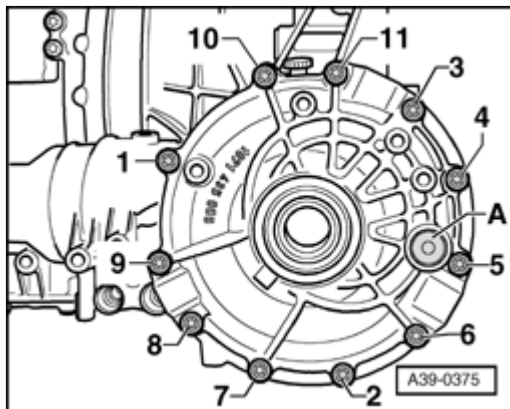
Removing/Installing Bolts On Final Drive Cover In Sequence
